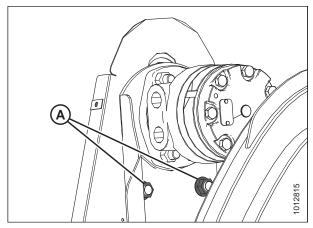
Single-Reel Drive Shown – Double Reel Similar
